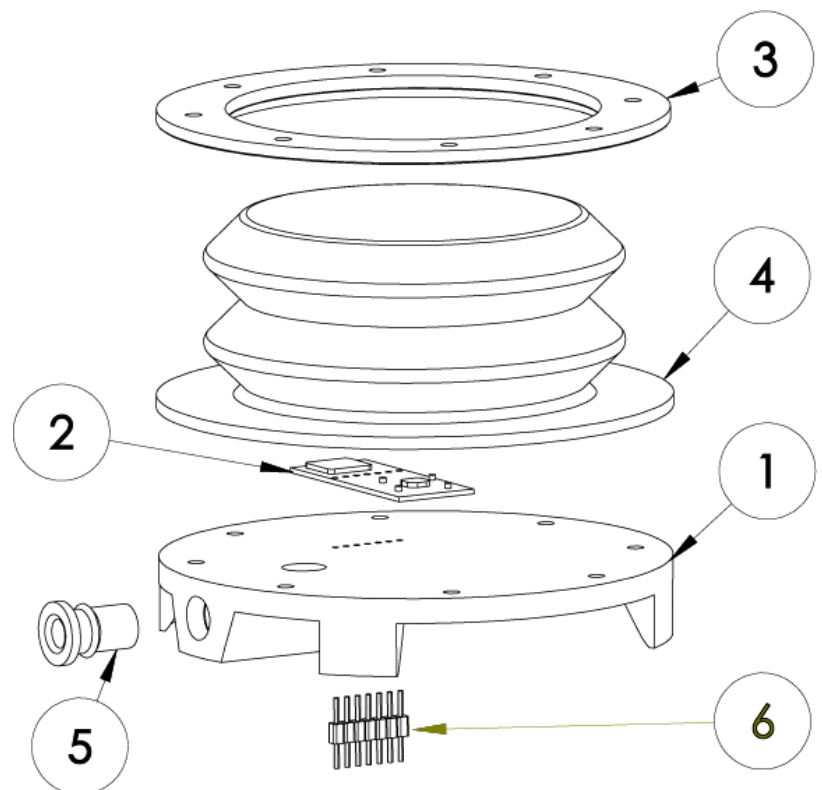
Exploded view of the module with (1) base plate, (2), PCB, (3) ring, (4) bellow, (5) tube holder, (6) connector pins
